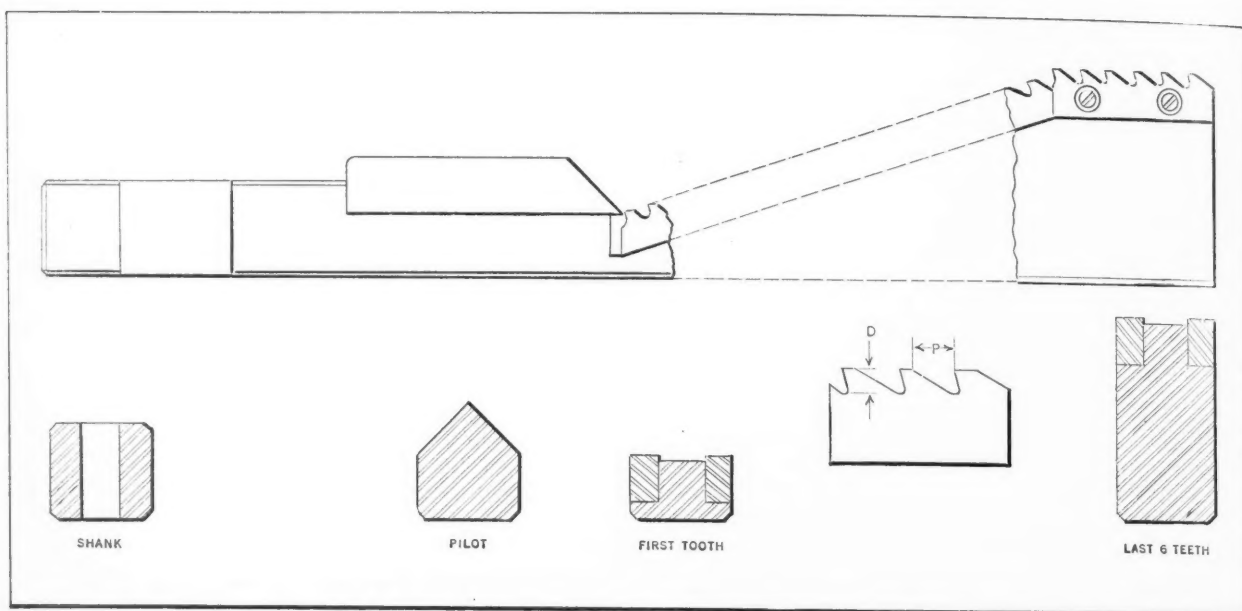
Broach for Finishing Work to Dimension B, Fig. 1
